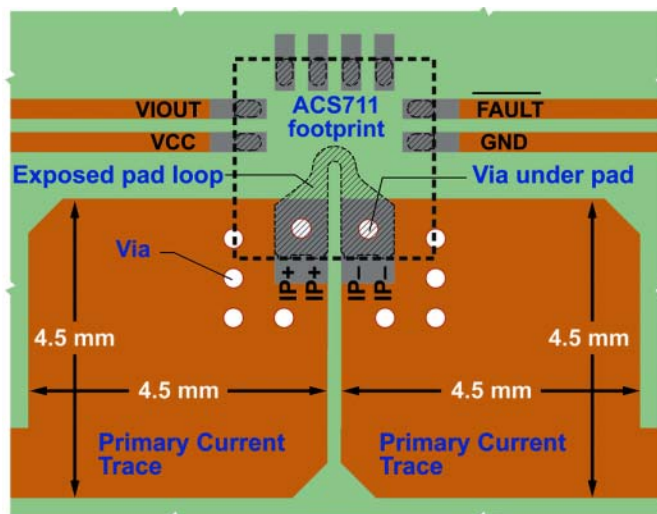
A PCB layout for the QFN Current Sensor (Allegro prototyping board 85-0528)
